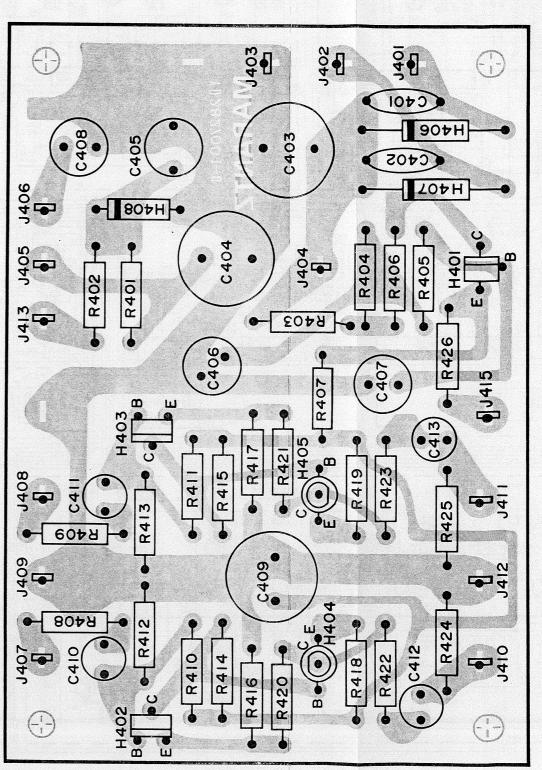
Pre-Amplifier and Power Supply Assembly P400 Component Locations
